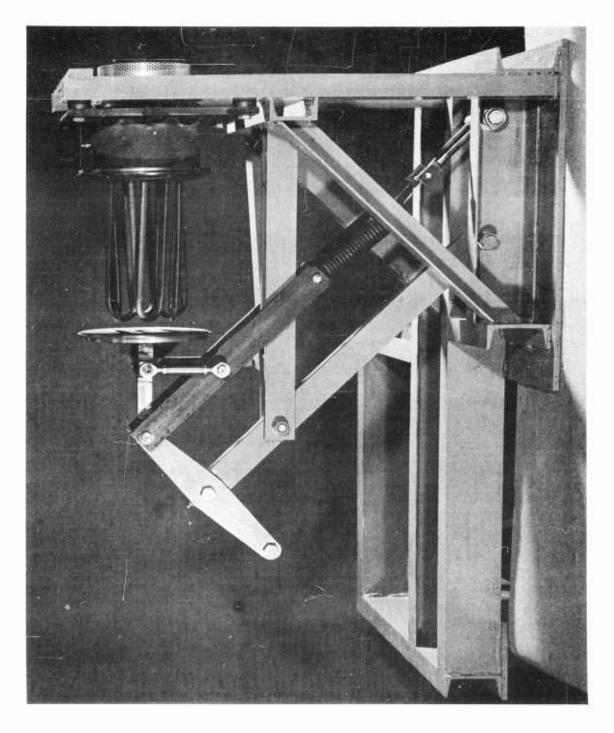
Fixture for Articulate Duct Outboard Seal Test with Electric Heater in Place
